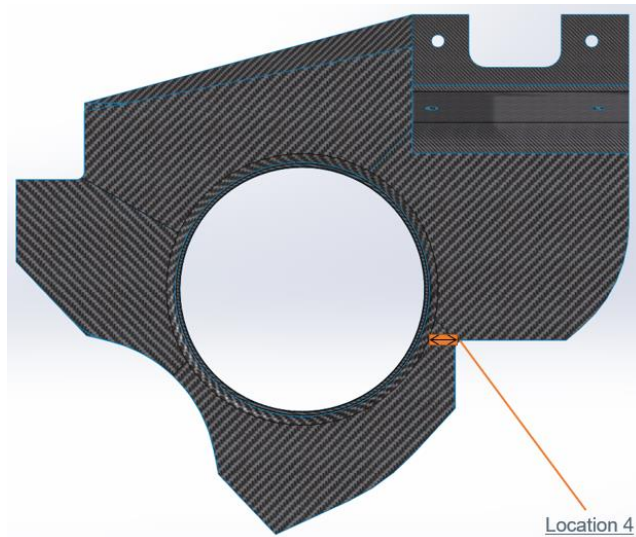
Strain Gauge Locations on Rear Upright - Inboard
